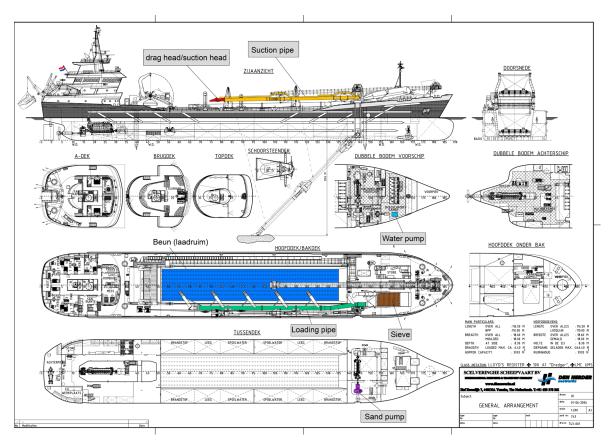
Drawing of the Scelveringhe showing the suction installation (suction head, suction pipe and sand pump) and the loading installation (sieve and loading pipe). (Source: DHS)
